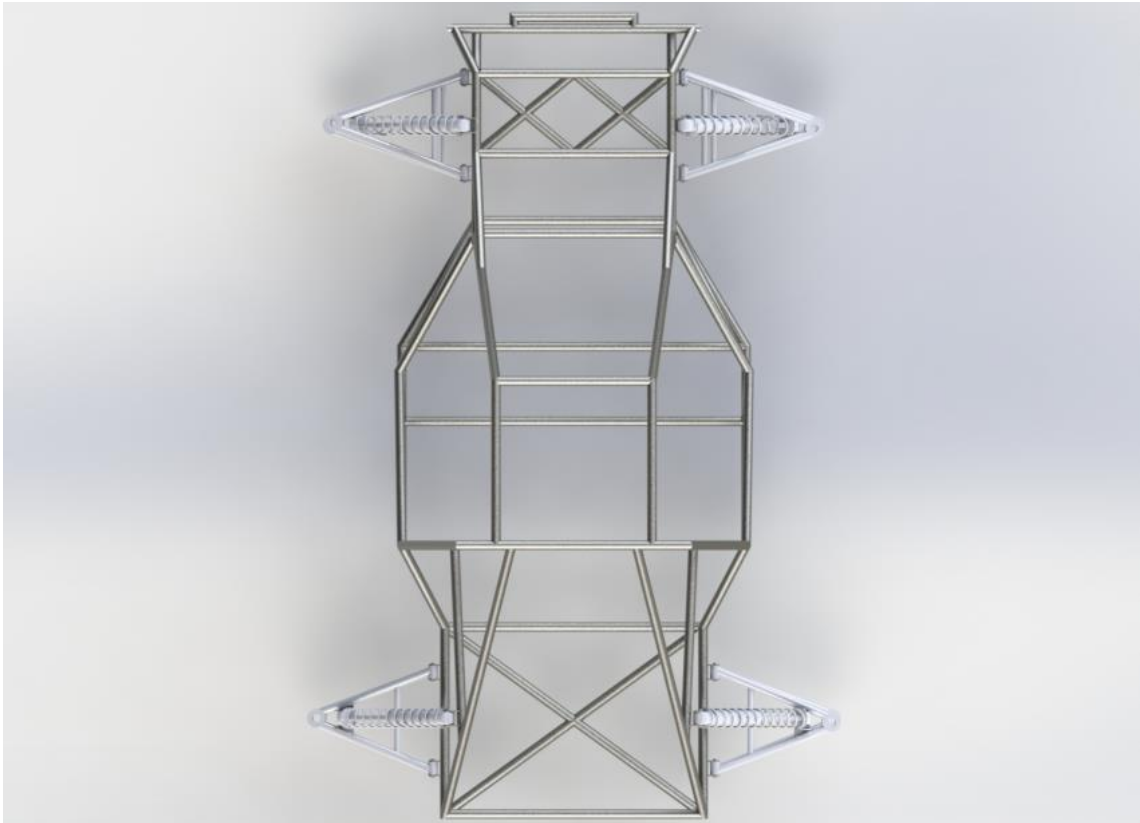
Top view of Baja with designed suspension system mounted on chassis
